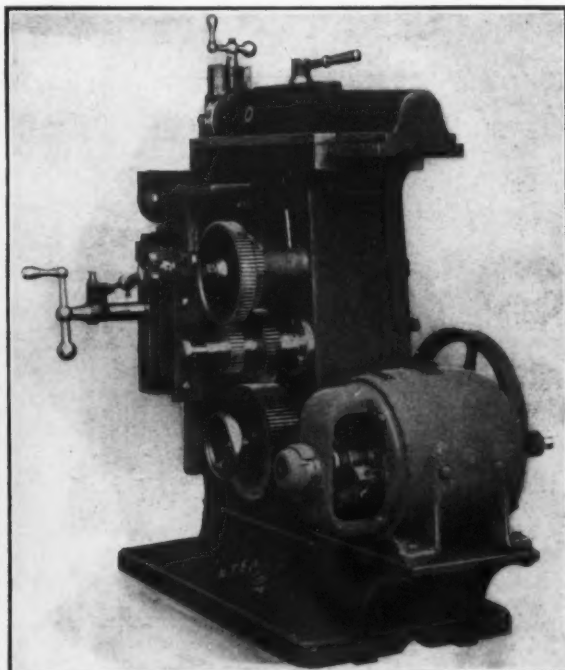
Another View of the Steptoe Motor Driven Shaper with the Gear Covers Removed.
